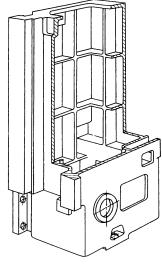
Column of a milling machine manufactured by the Kearney and Trecker Corp. (USA)
